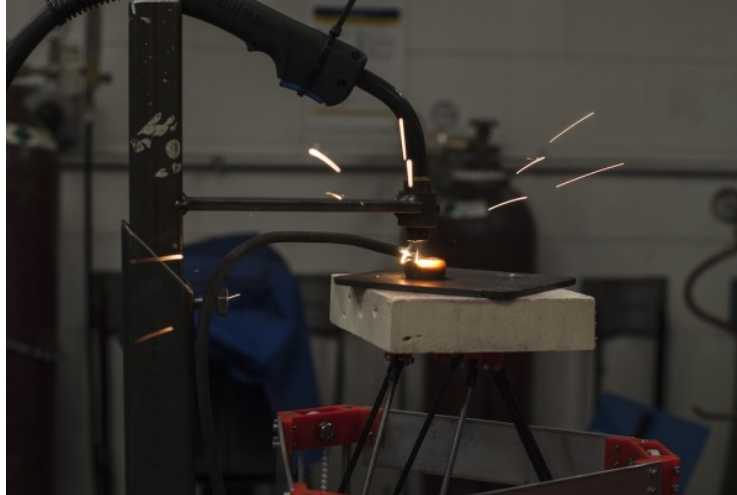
3D Printer with Gas-Metal Arc Welding[59]
